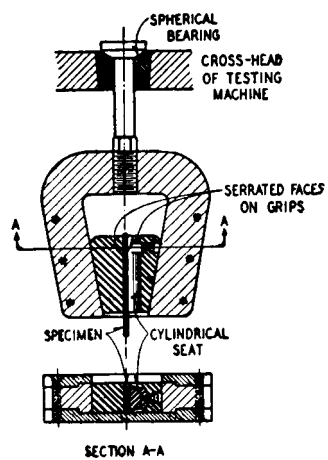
WEDGE-TYPE GRIPPING DEVICE
